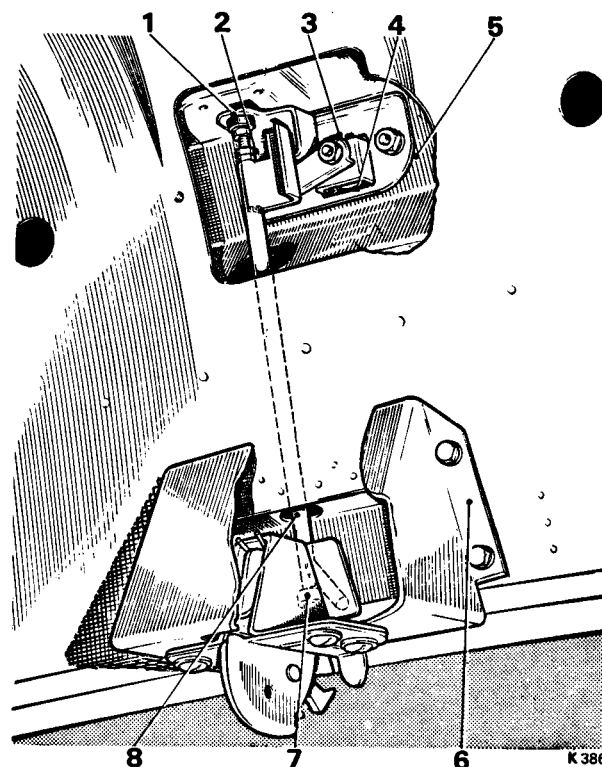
LUGGAGE COMPARTMENT LID LOCK MECHANISM (4-Door Saloon and Long Wheelbase Cars)
